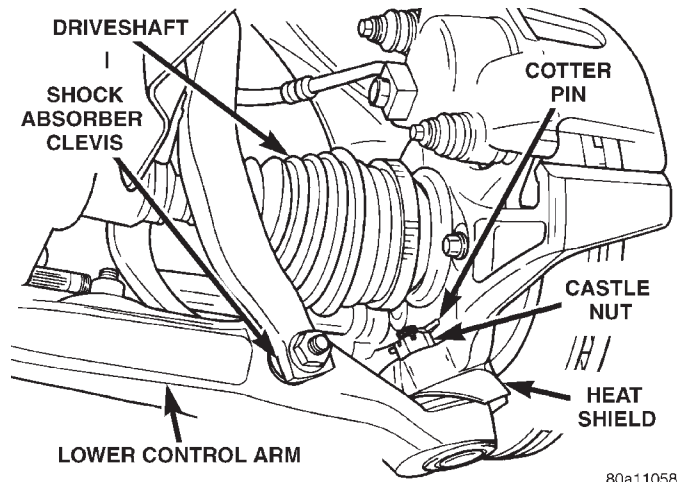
Lower Ball Joint Attachment To Steering Knuckle
